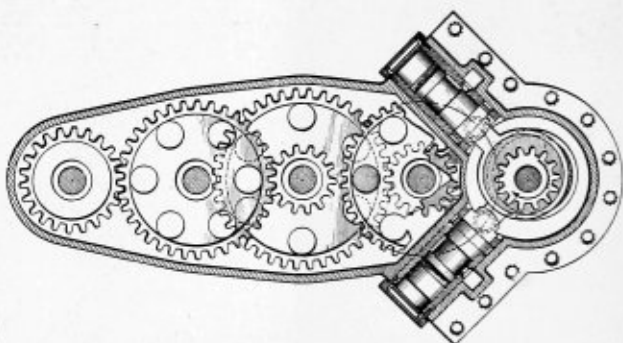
SECTION OF THE DRILL SHOWING THE DRIVING MECHANISM.
